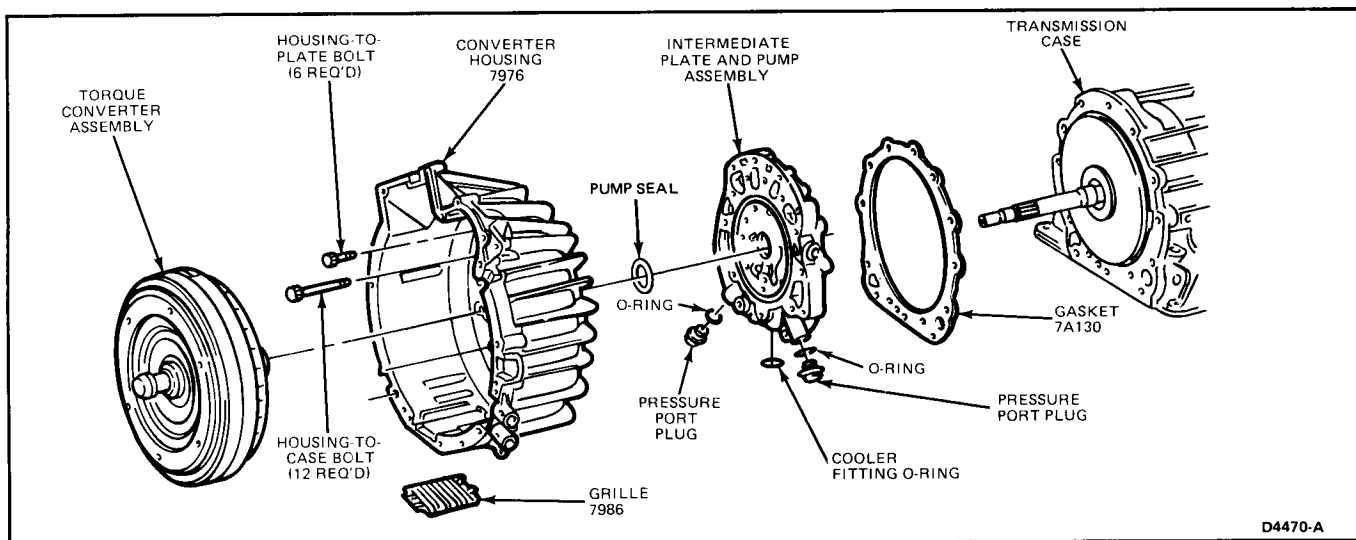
Converter Housing, Intermediate Plate Gasket and Pump Seal—Removal
